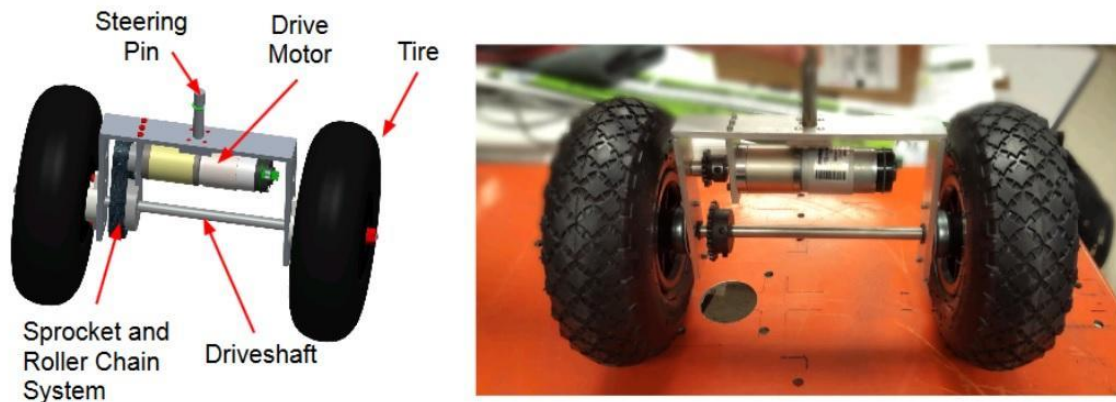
Steering and Drive assembly used by the Robo-Weeder.
